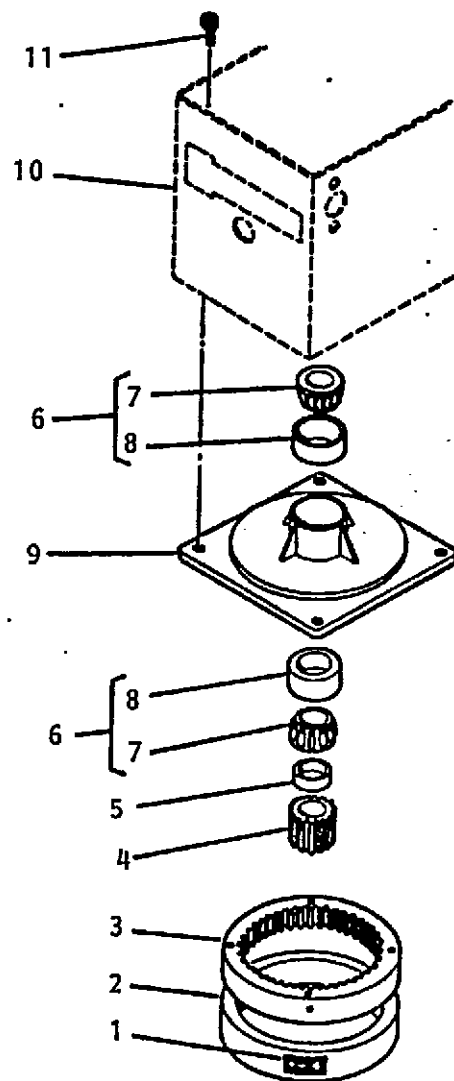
LOWER PLANETARY AND BEARING HOUSING ASSY
